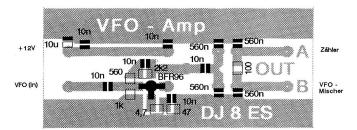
Component layout with the surface-mount parts on the track side of the PCB
